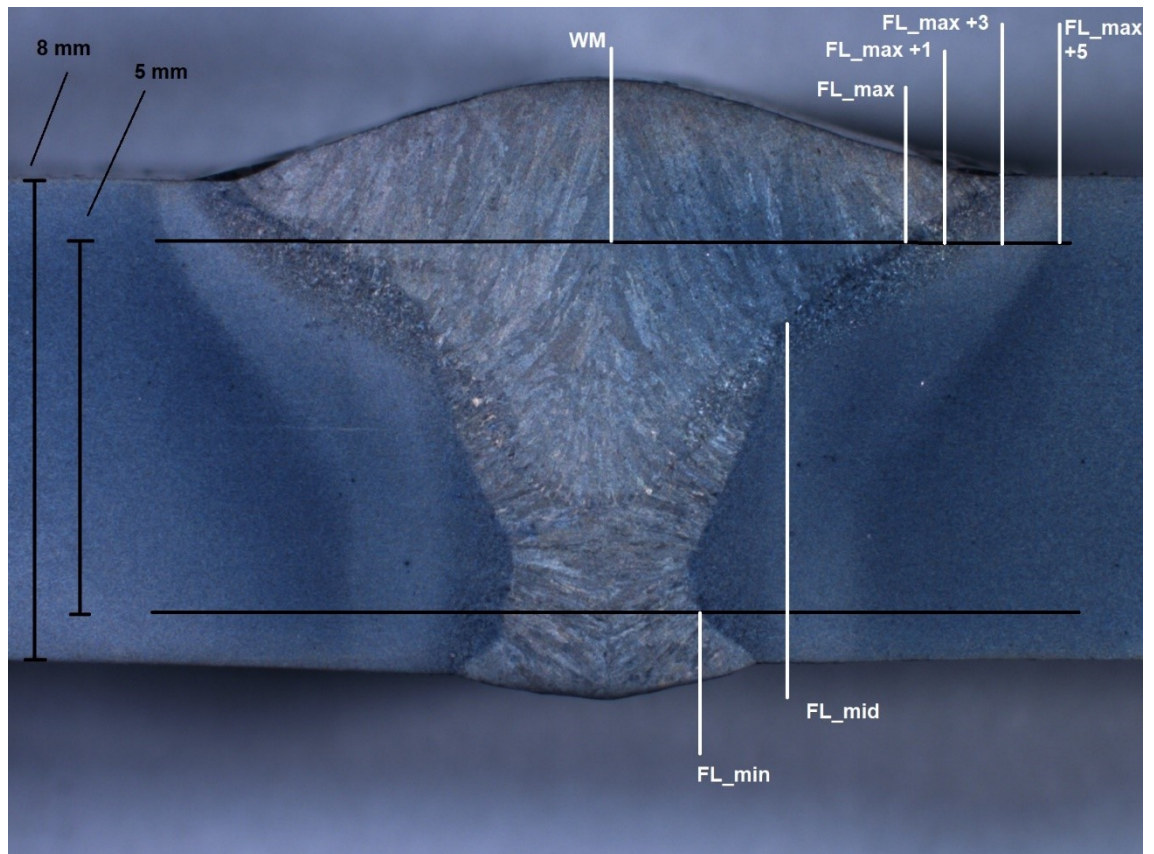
$10 \times 5 \times 55$  mm sub-sized CVN-impact toughness samples on the weld
